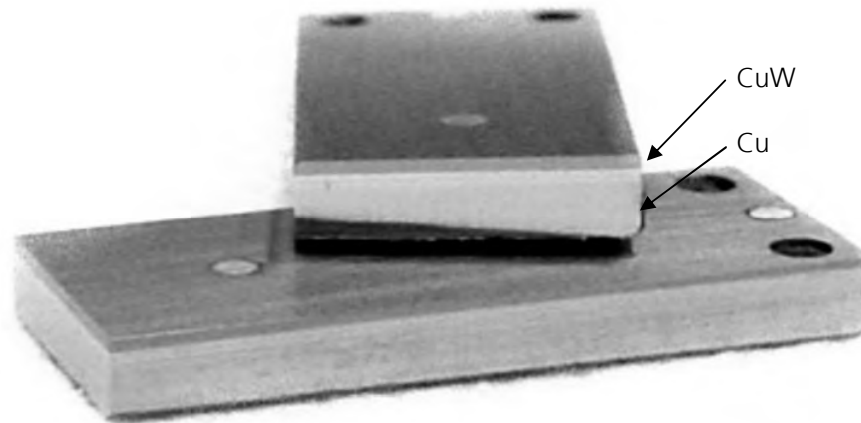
Unplated prototype of a "top-layer" heat sink
